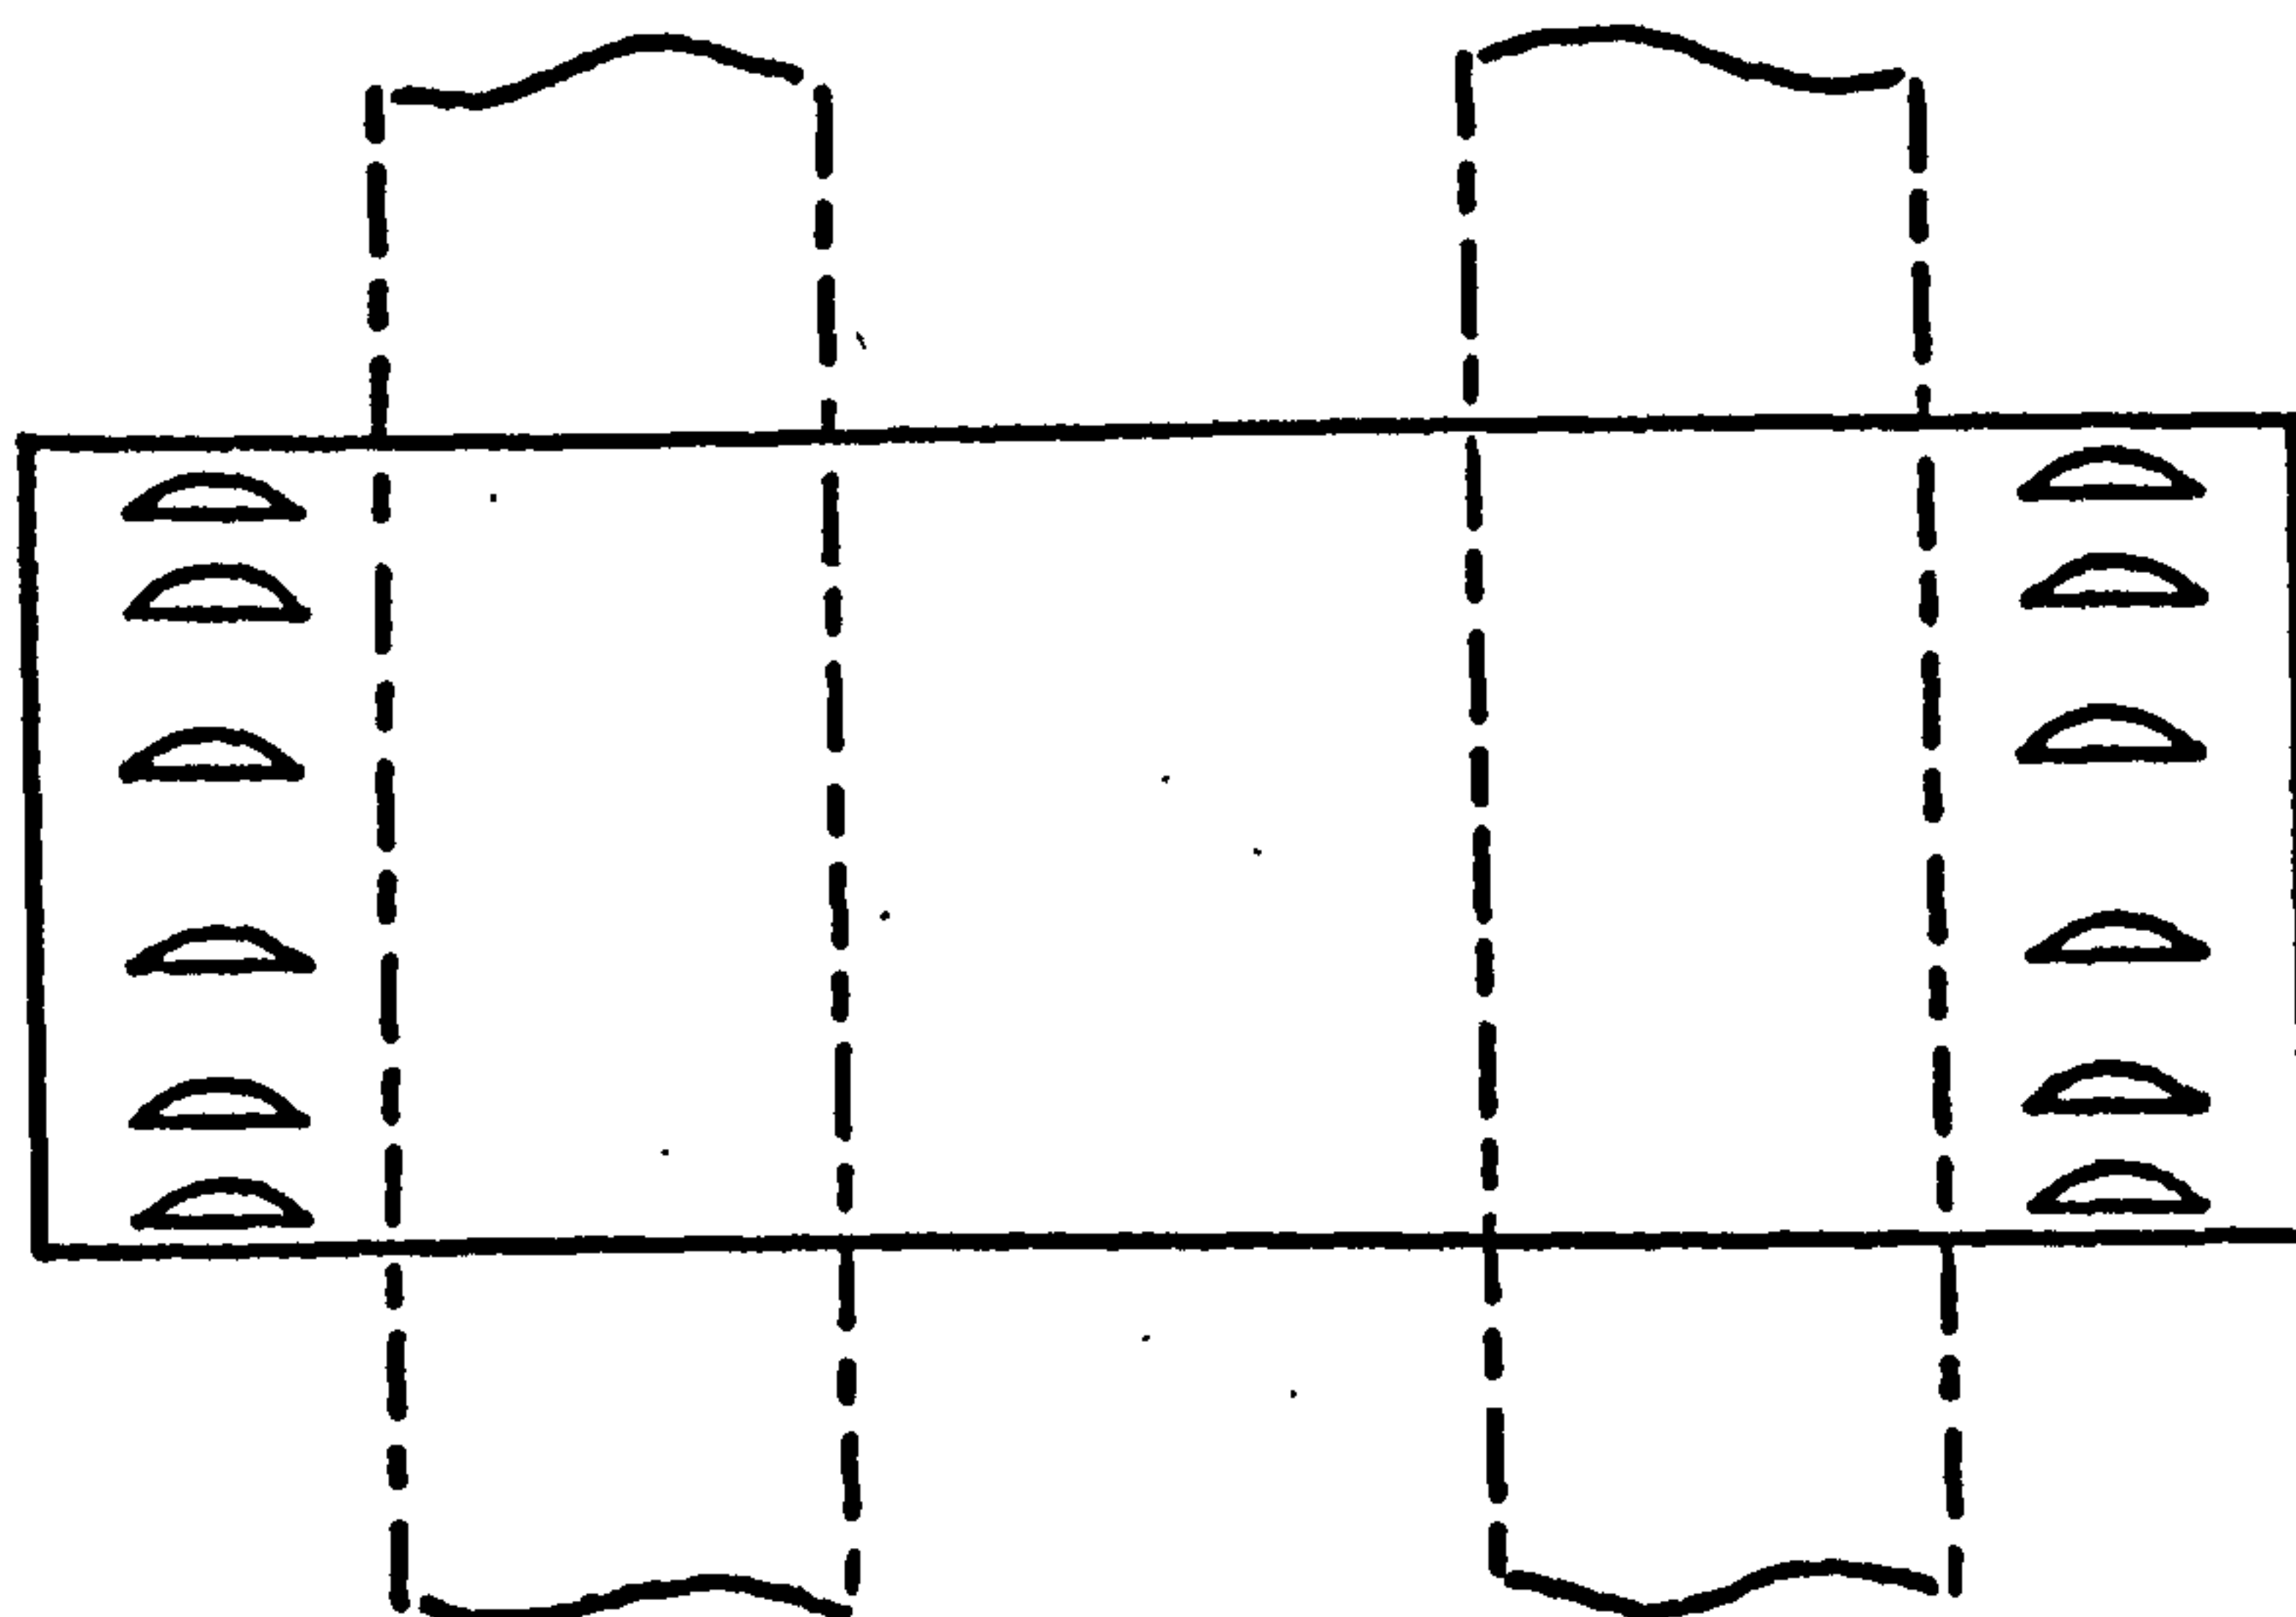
The cylindrical titanium foil bearing rotor
